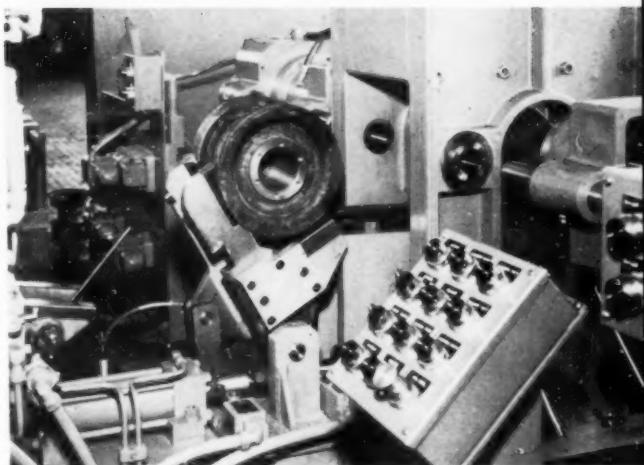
Transfer of part between boring machine and line-index fixture. All operations are automatic.
